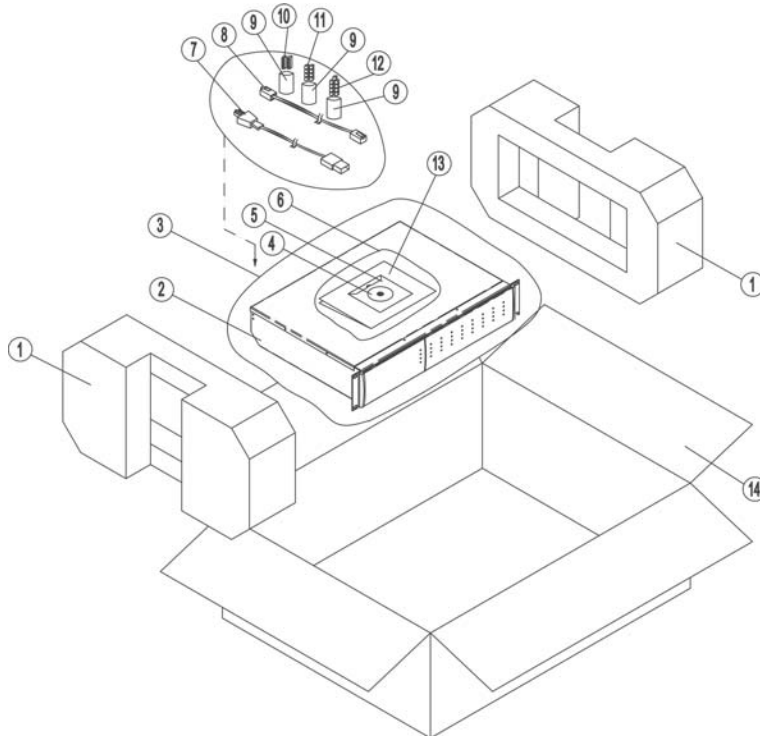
ESP-88C/ESP-00 Chassis Packing View
